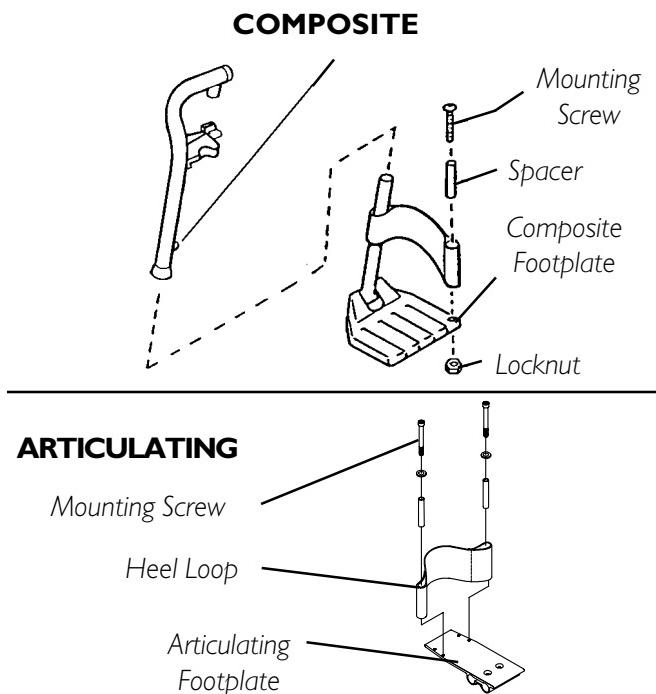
COMPOSITE/ARTICULATING FOOTPLATE HEEL LOOP REPLACEMENT
